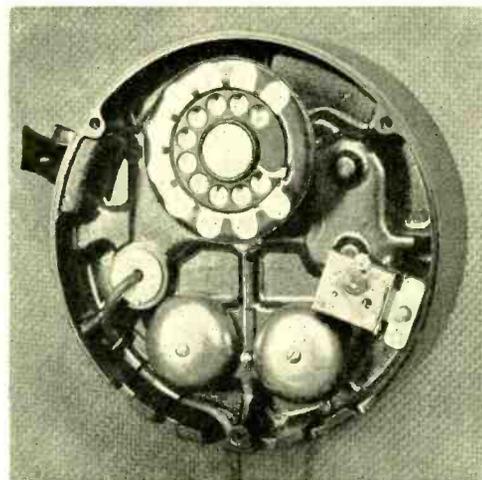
The gongs and dial fingerwheel are mounted on the front of the housing under or within the face plate
